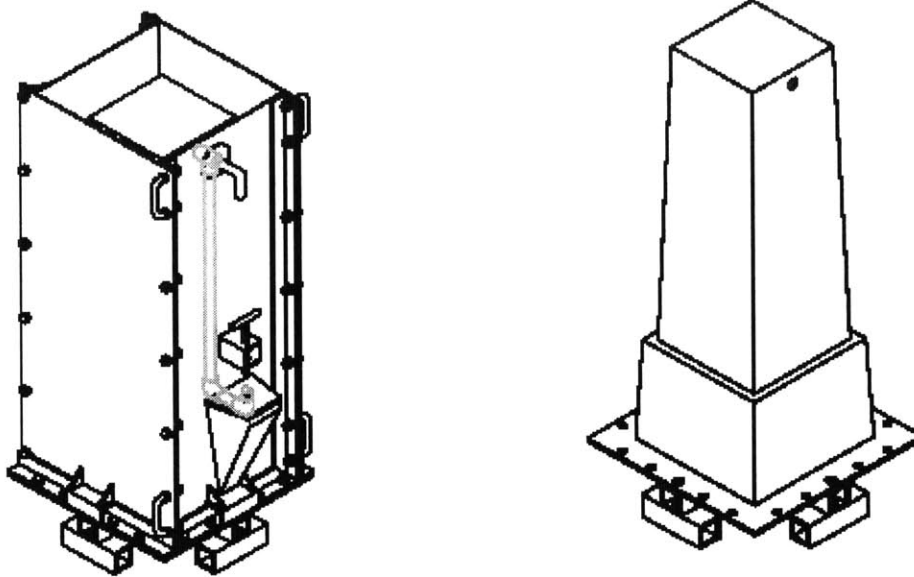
BioSand filter molds. The outer mold (left) shows the placement of the pipe assembly in gray, and the inner mold has a hole where the pipe assembly should be connected. Source: DAVNOR, 1998.
